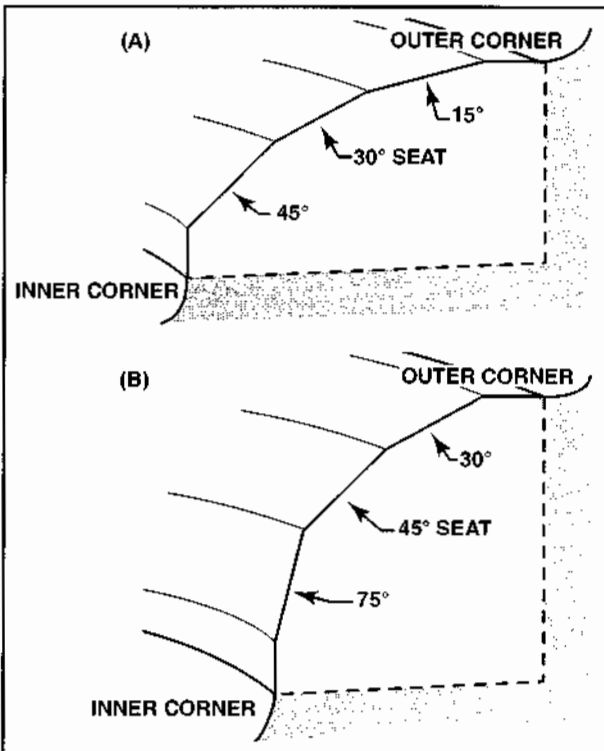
(A) To narrow the seat of a 30° valve seat, regrind the outer corner with a 15° stone and the inner corner with a 45° stone. (B) For a 45° valve seat, use a 30° stone to grind the outer corner and a 75° stone to grind the inner corner.
